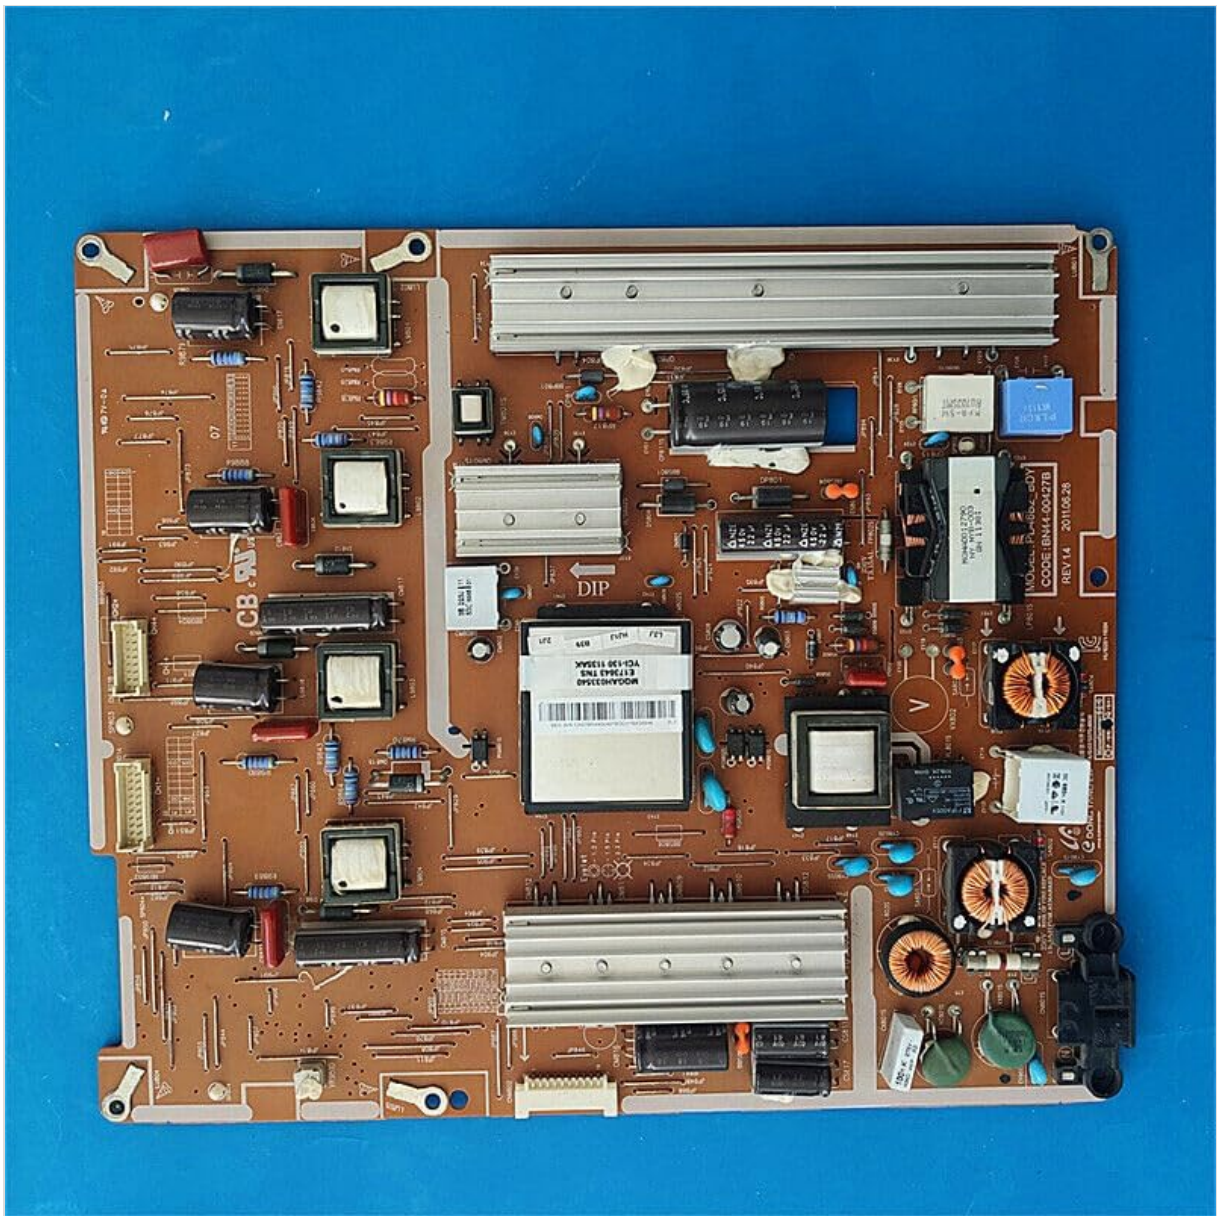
Top view of the BN44-00427A BN44-00427B Power Supply Board, showing its overall layout with various components like capacitors, transformers, and heatsinks. This is the main view of the replacement part.
